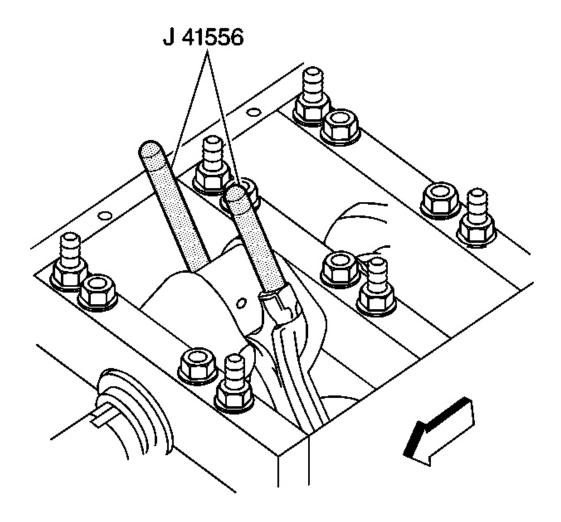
View Of J 41556 & Connecting Rod Courtesy of GENERAL MOTORS CORP.
